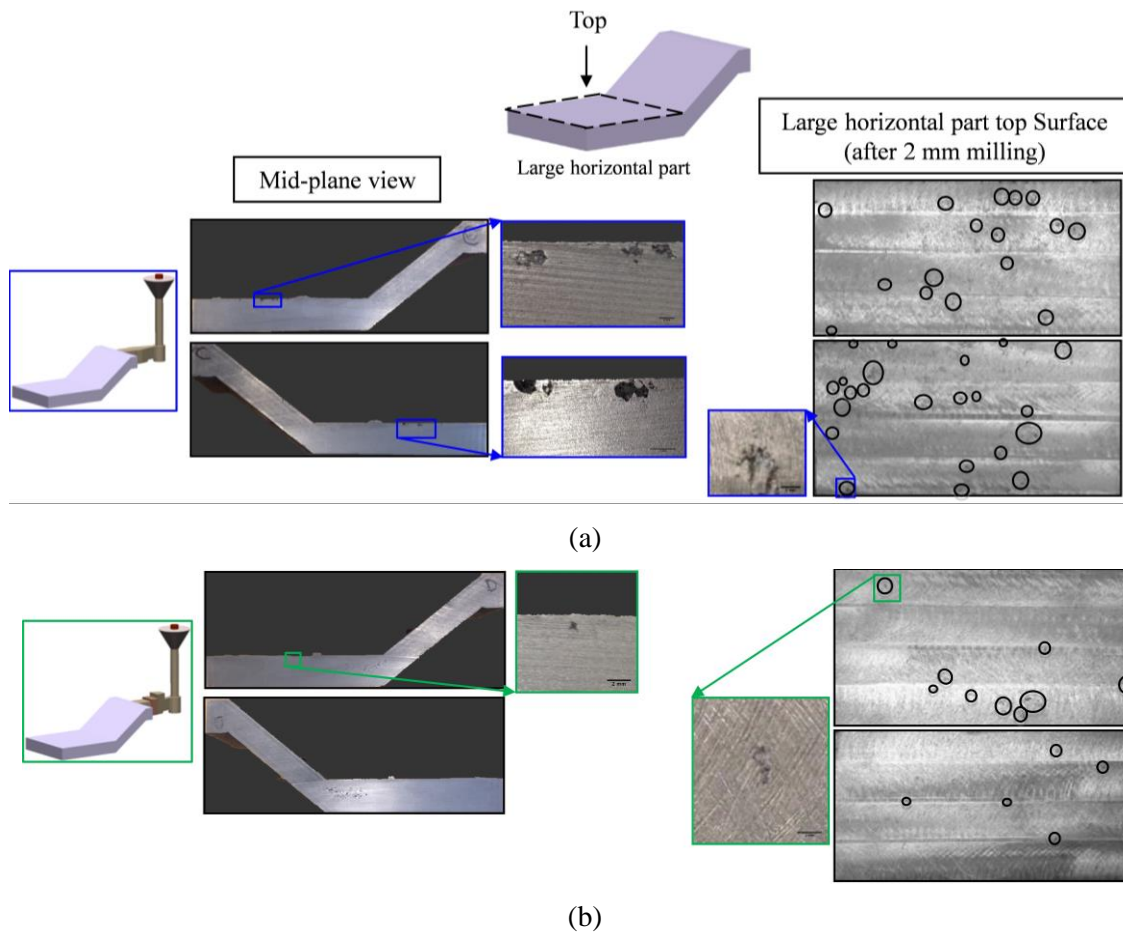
Castings with inclined surface (a) Casting without filter, and (b) casting with filter.
